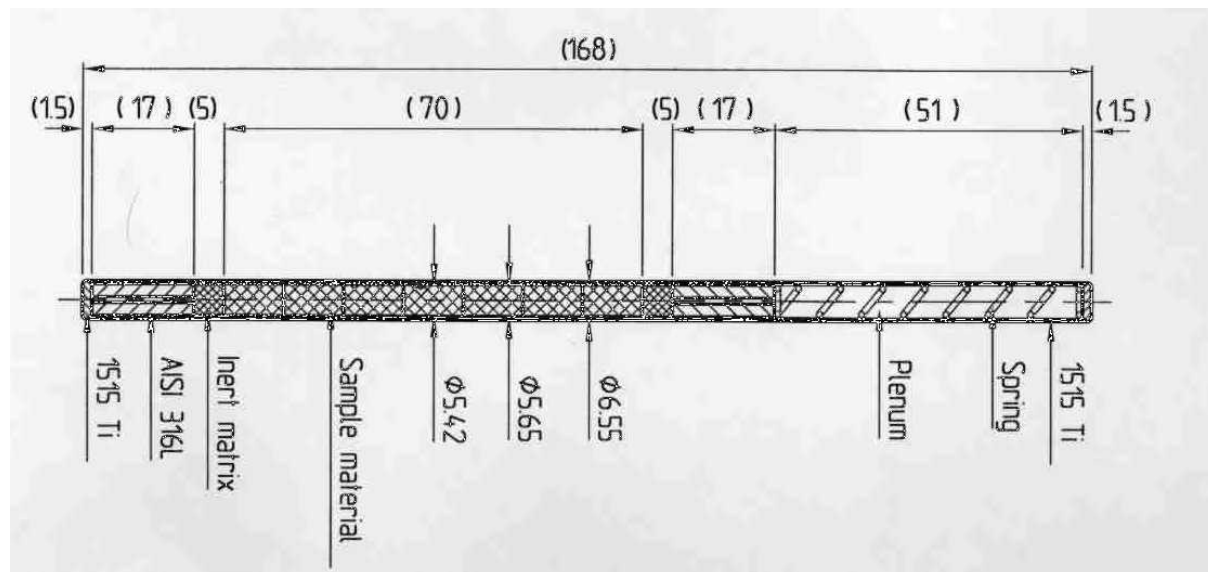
Drawing of T3 capsule [Conrad 1997].
